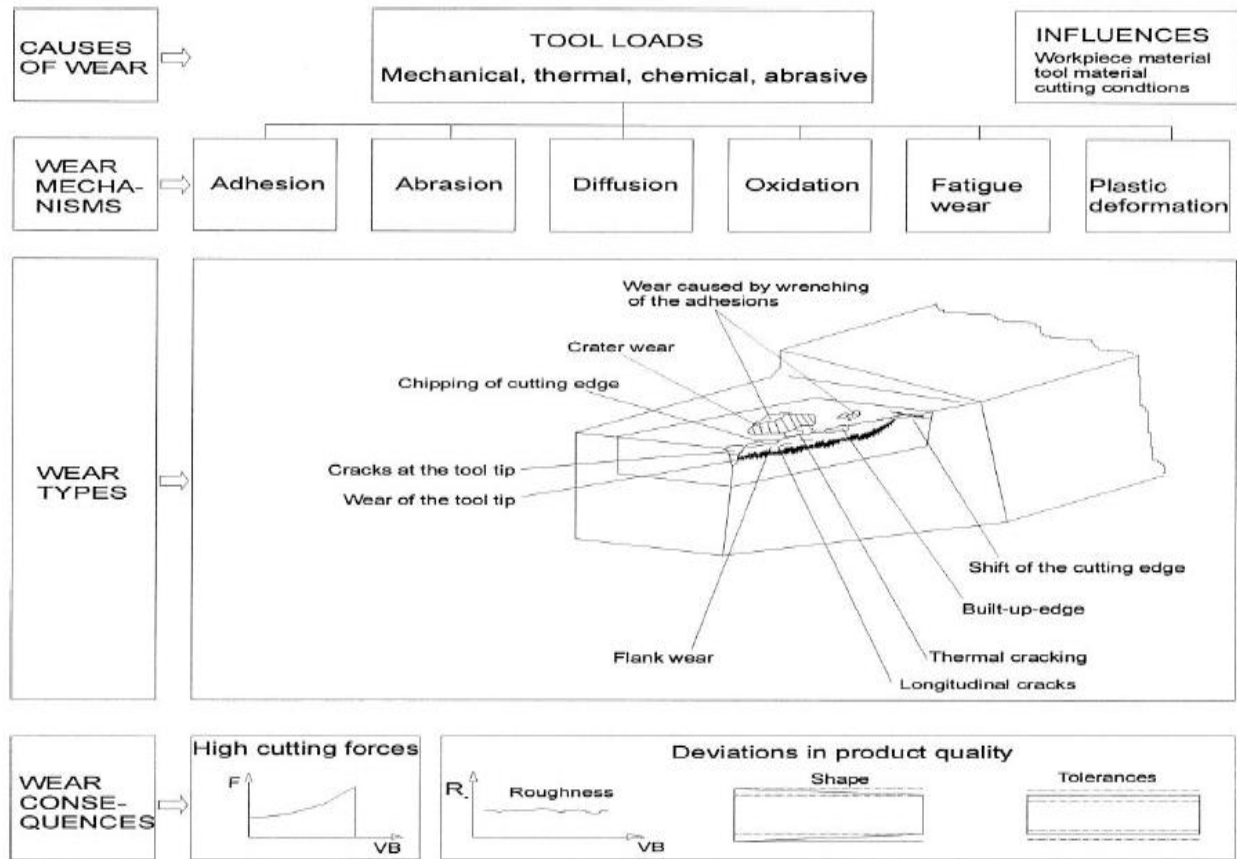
Causes, mechanism, types and consequences of tool wear [75]
